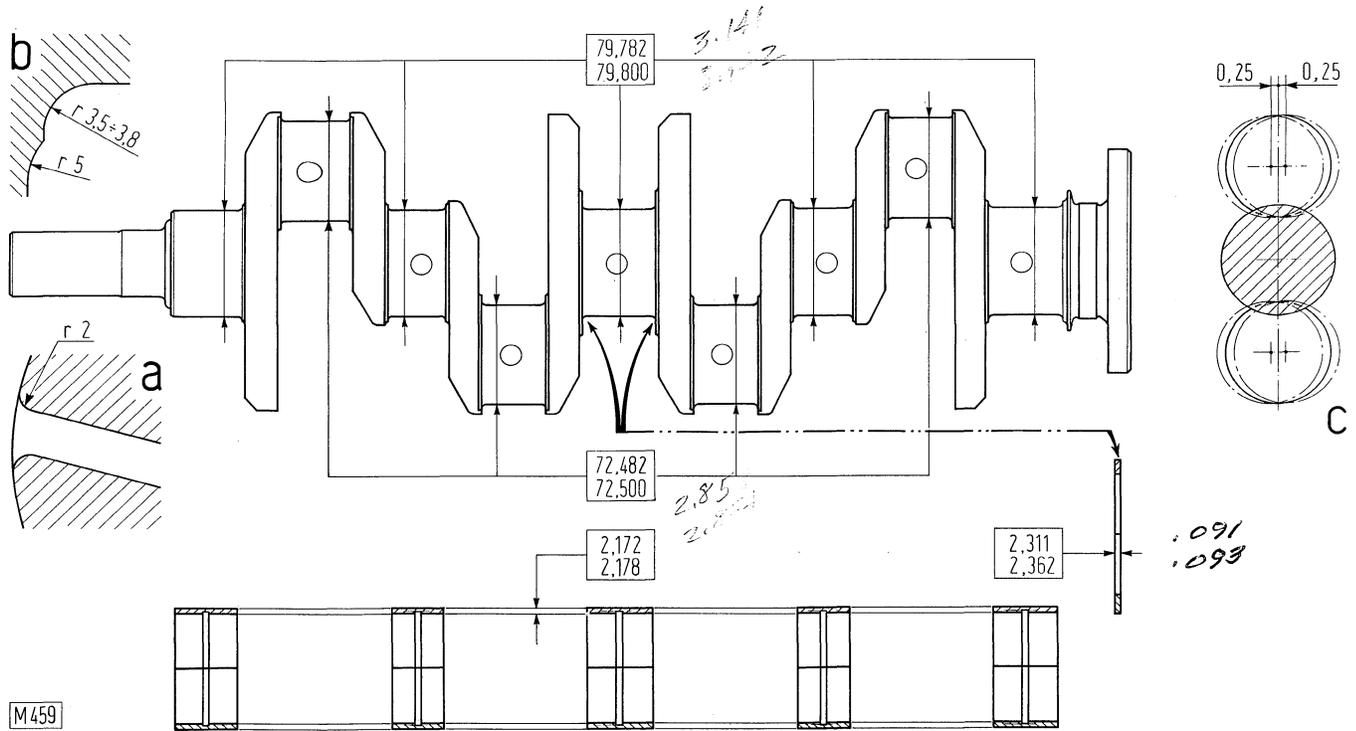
Crankshaft journal, bearing and thrust washer details
